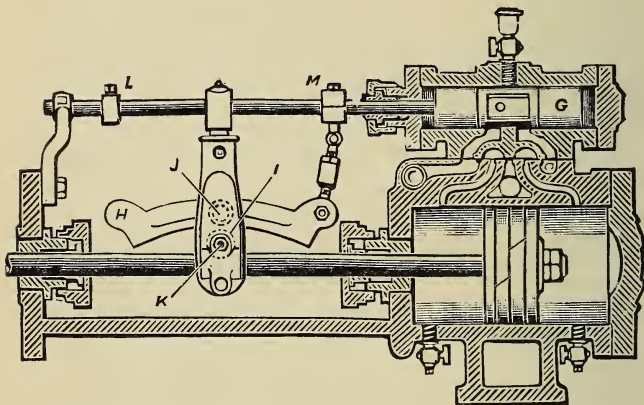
The Knowles pump. A piston valve G in the steam chest moves the main valve. This valve piston is driven alternately backward and forward by the pressure of steam, carrying with it the main valve, which admits steam to the main steam piston that operates the pump. The main valve is a plain slide whose section is of B form, working on a flat seat. The valve piston is slightly rotated back and forth by the rocker bar, H; this rotative movement places the small steam ports D E F, fig. 74., which are located in the under side of the valve piston in proper position with reference to the corresponding ports, A B, cut in the steam chest. Steam enters through the port at one end and fills the space between the valve piston and the head, drives the valve piston to the end of its stroke and carries the main slide valve with it. When the valve piston has traveled a certain distance, a corresponding port in the opposite end is uncovered and steam enters, stopping its progress by giving it the necessary cushion. The piston rod with its tappet arm, J, fig. 73, moves backward and forward with the piston. At the lower part of this tappet arm is attached a stud or bolt, K, on which is a friction roller, I. This friction roller, lowered or raised, adjusts the pump for a longer or shorter stroke. This roller coming in contact with the rocker bar at the end of each stroke, and this motion is transmitted to the valve stem, causing the valve to roll slightly. This action opens the ports, admits steam and moves the valve piston, which carries with it the main slide valve which admits steam to the main piston. The upper end of the tappet arm does not come in contact with the tappets, L M, on the valve rod, unless the steam pressure from any cause should fail to move the valve piston, in which case the tappet arm moves it mechanically.
